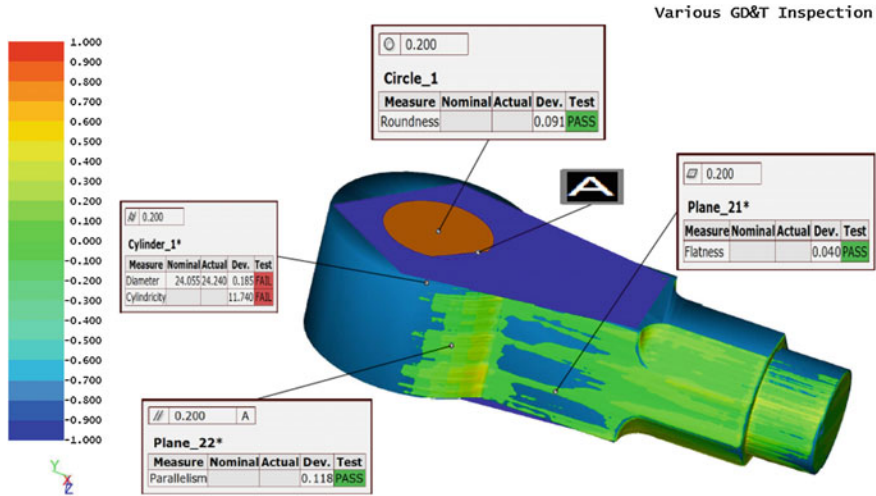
GD&T inspection (3-2-1 alignment)
